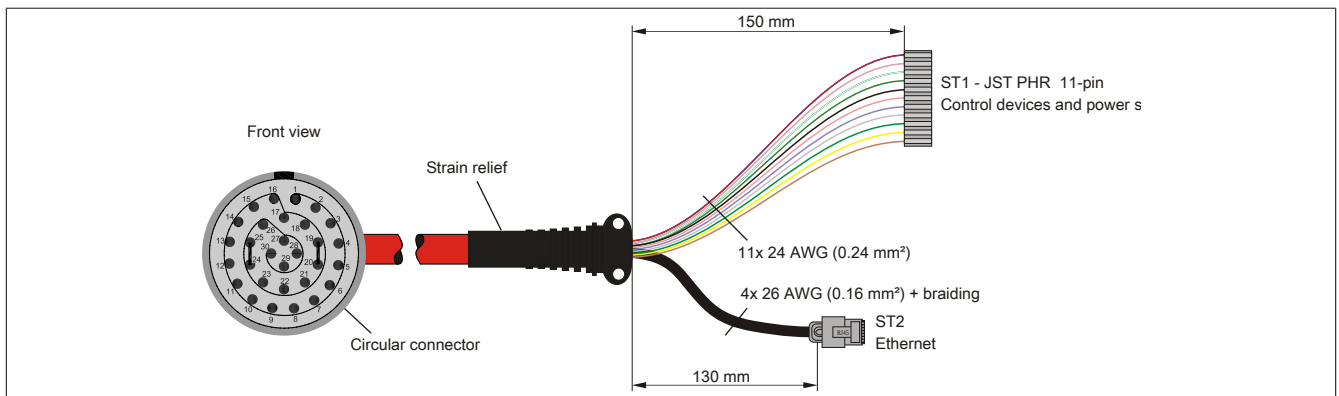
5CAMPH.0xxx-30 - Cable pinout for attachment cables
